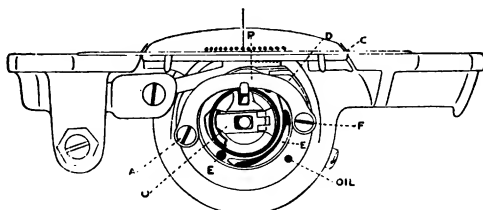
Remove the screws *A* and *F* to release the shuttle race on the Standard rotary.
